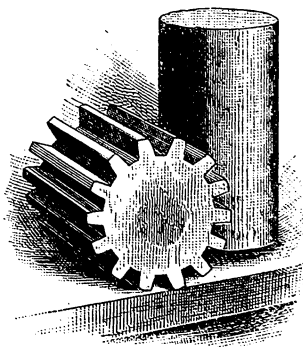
Billet and Hot Pressed Steel Pinion.
